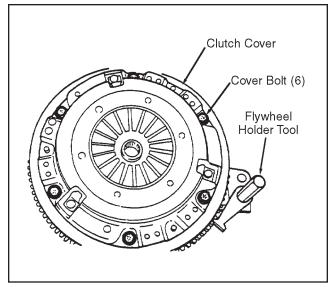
D-2. Clutch Cover and Disc Removal and Replacement
